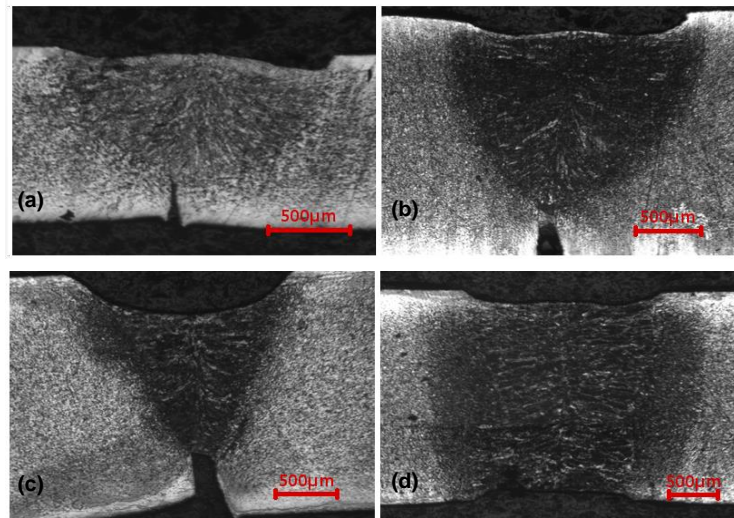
Shape of the weld (a) round shape, (b) wide V shape, (c) sharp V shape, (d) parallel edge
